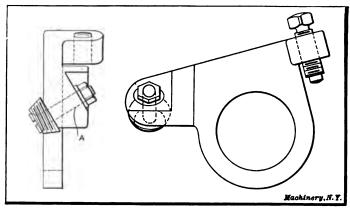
Cross-slide Holder for applying a Thread Roll to a Beveled Piece
